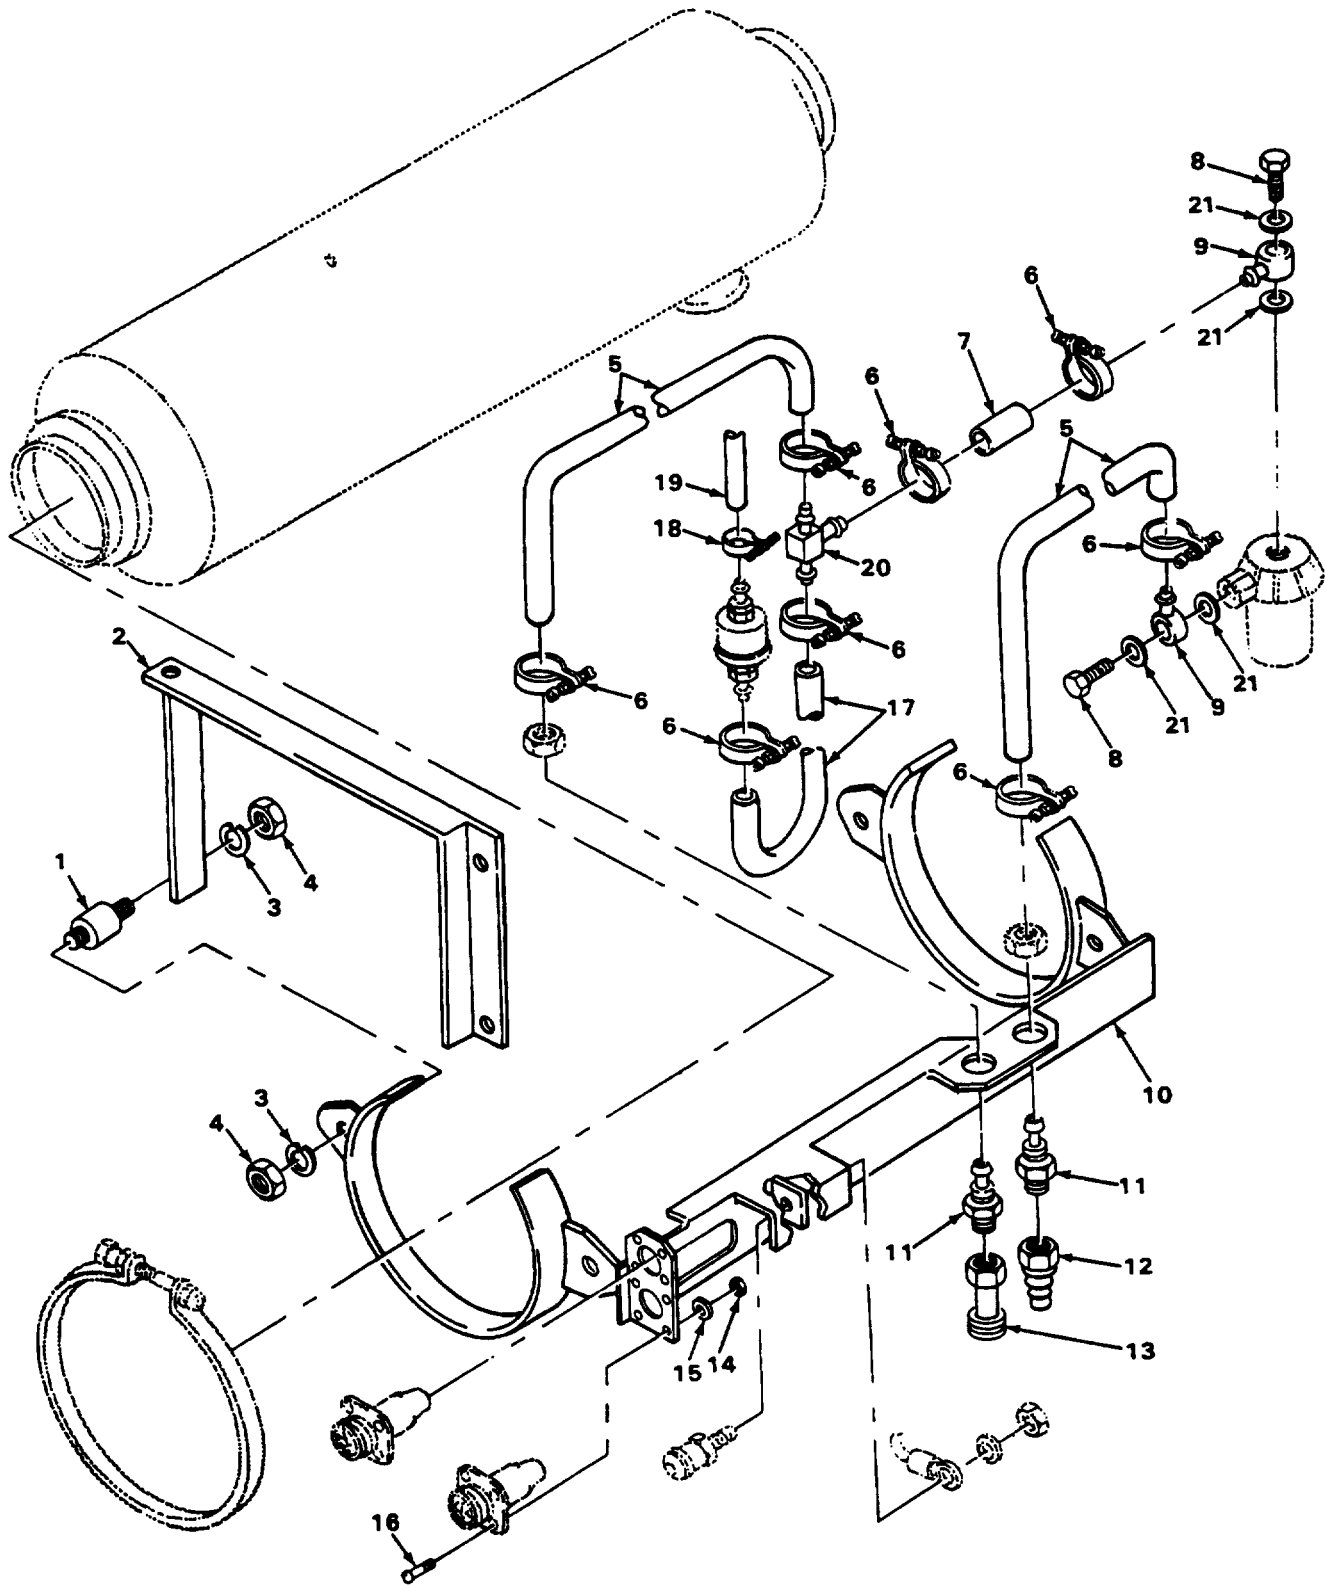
ESPAR MODEL V7S MOUNTING ASSEMBLY.
